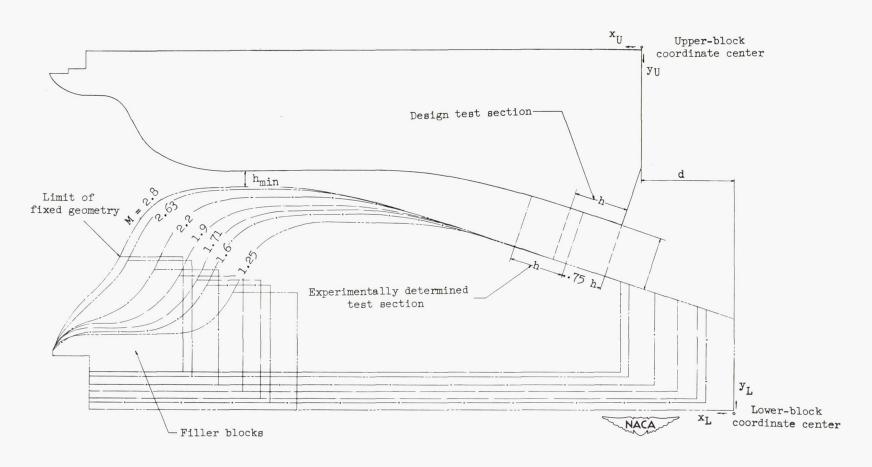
Assembly drawing of nozzle blocks. (Mach numbers indicated are the theoretical Mach numbers for which the block was set.)
